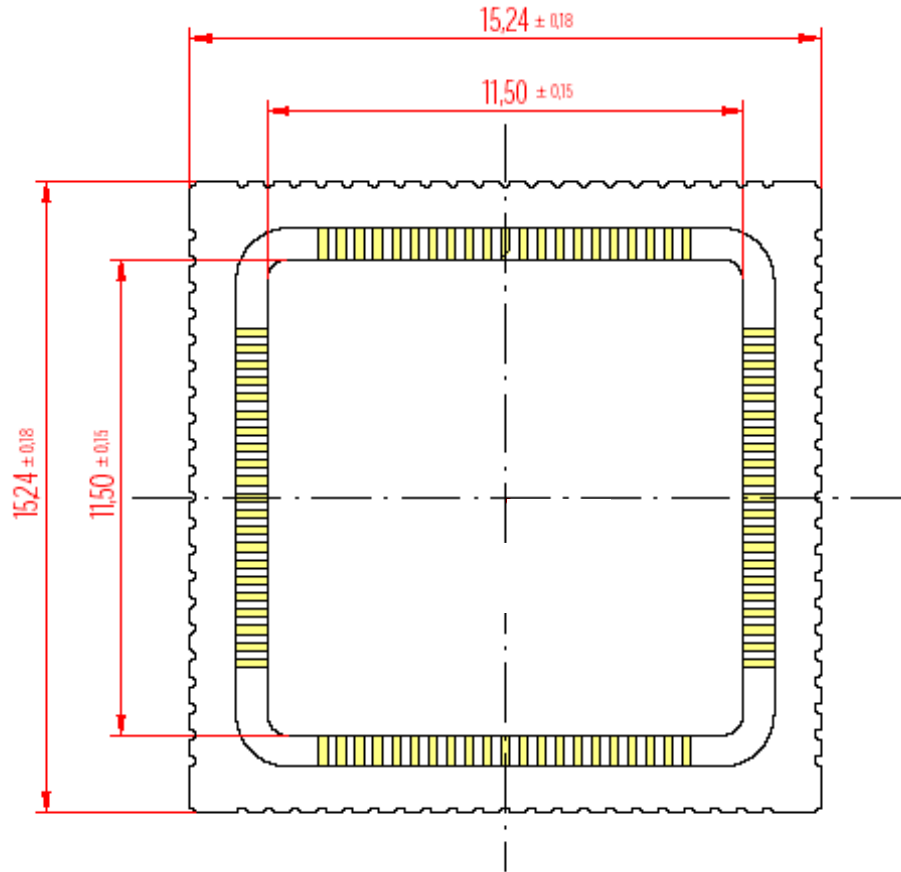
Top view of the 84-pins LCC package (all dimensions in mm).
